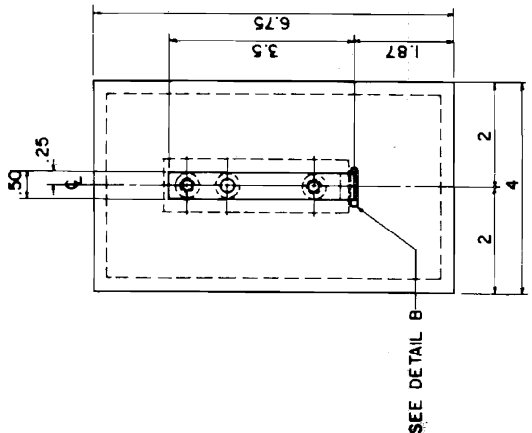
Assembly and Details for Lateral Expansion Gage.
